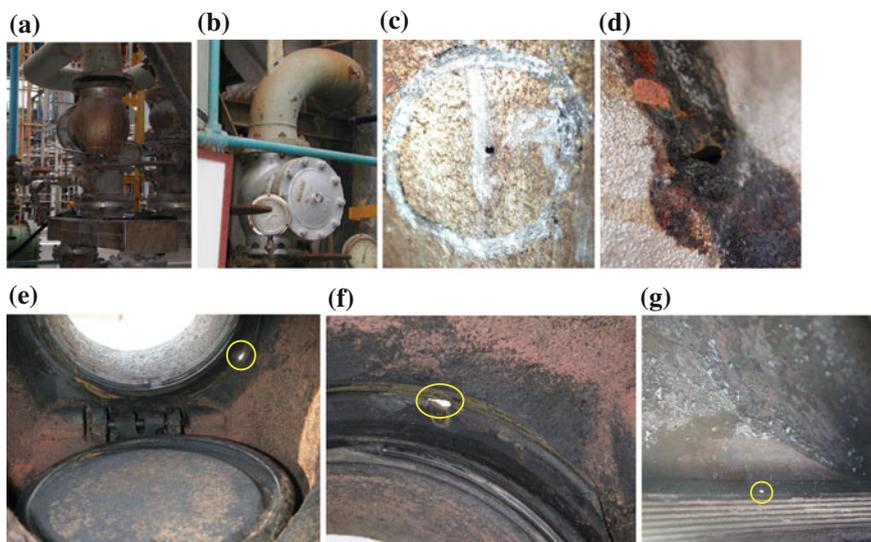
a, b Locations of two failed valves at the vacuum unit. c, d Corrosion holes on the valve body (outside view). e–g Inside view of corroded internals with corrosion holes
